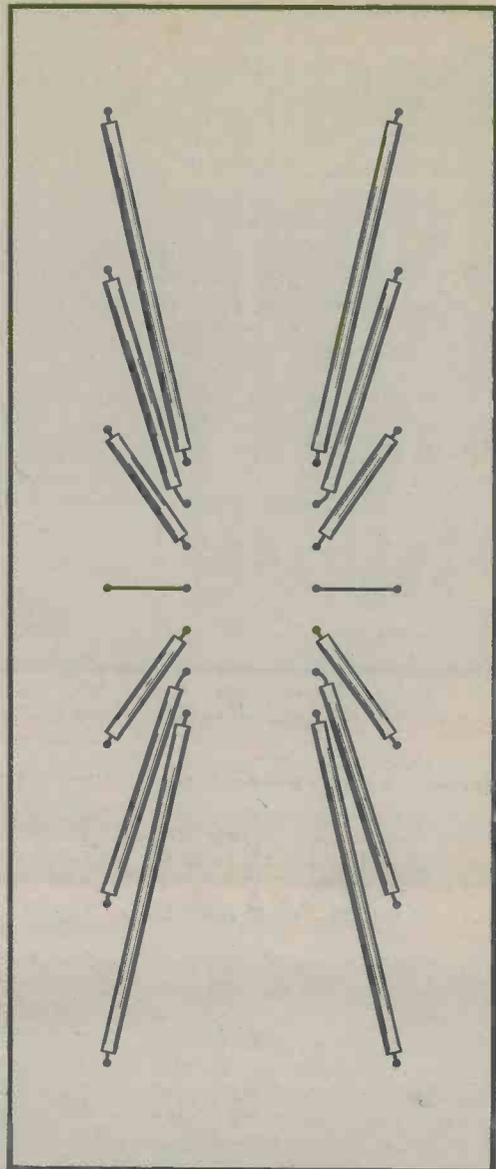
Final wiring of the i.c. holder leads to the pins. This wiring is carried out on the non-copper side of the board
